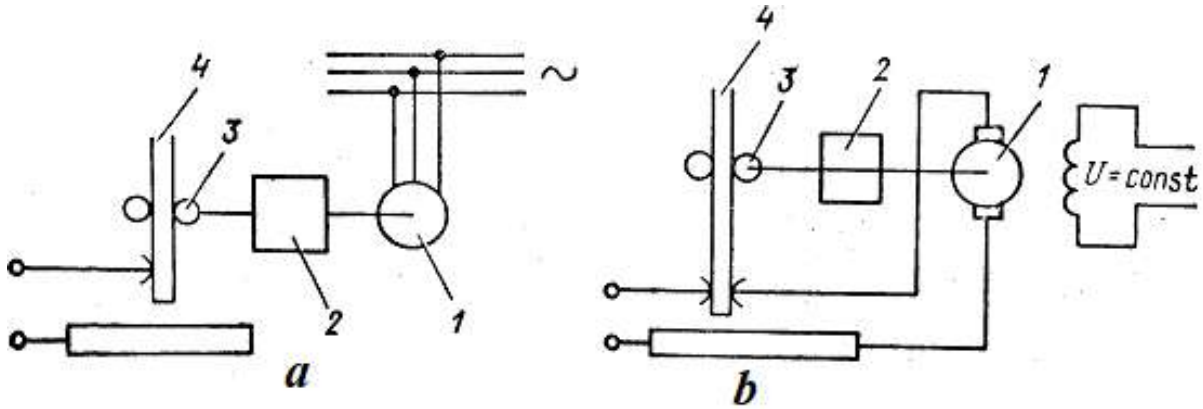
Schematic diagram of the structure of the welding head:
